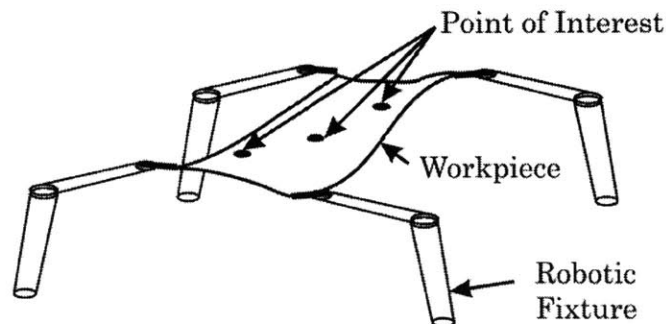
Robotic fixtures with sheet workpiece; car door welding example.
